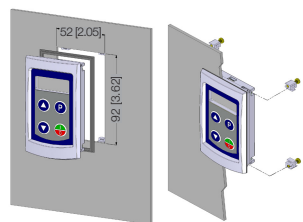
CFW100-KHMIR dimensions in mm [in] for panel mounting
